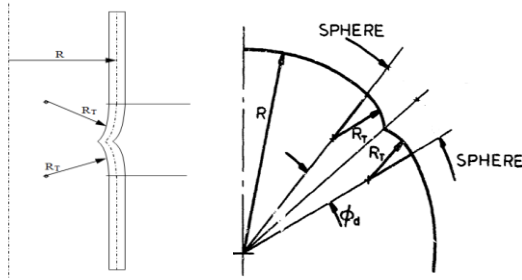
Geometry of cylindrical and spherical pressure vessel having weld sinkage[9]
